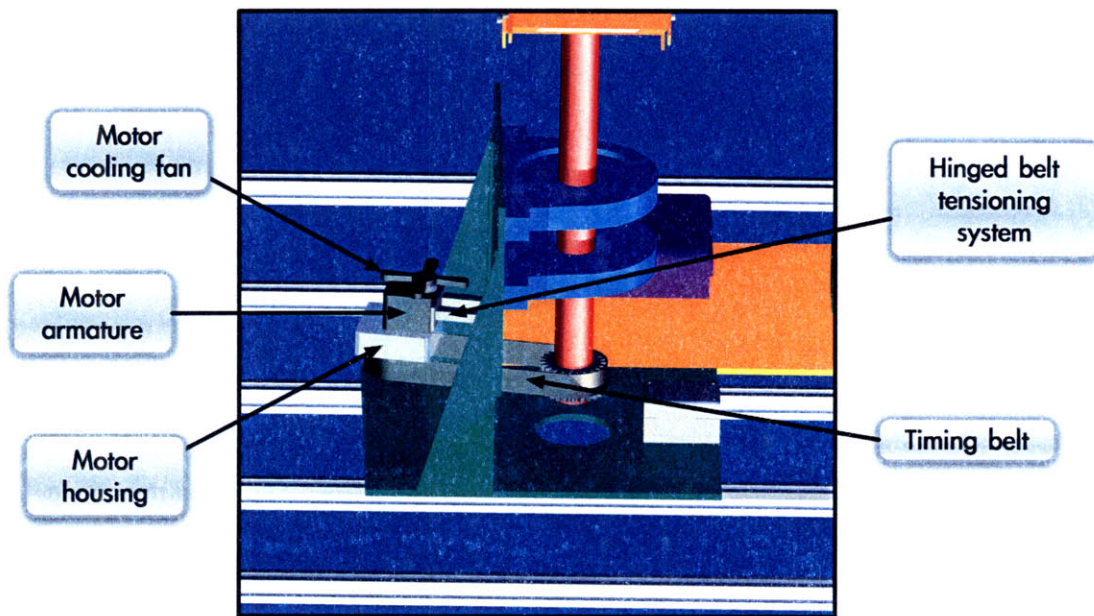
Motor, mounting block and belt (CAD: Kendra Toole)
